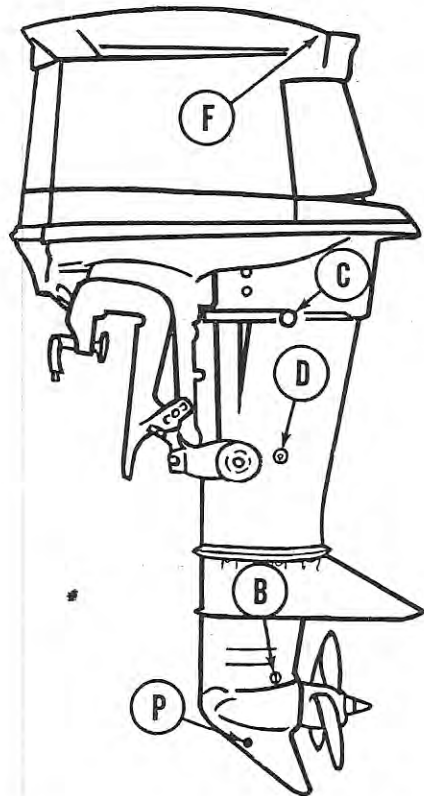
Port side view of the HOME-LITE Four-Cycle outboard motor showing drain and filler plug location for power head and lower unit.
